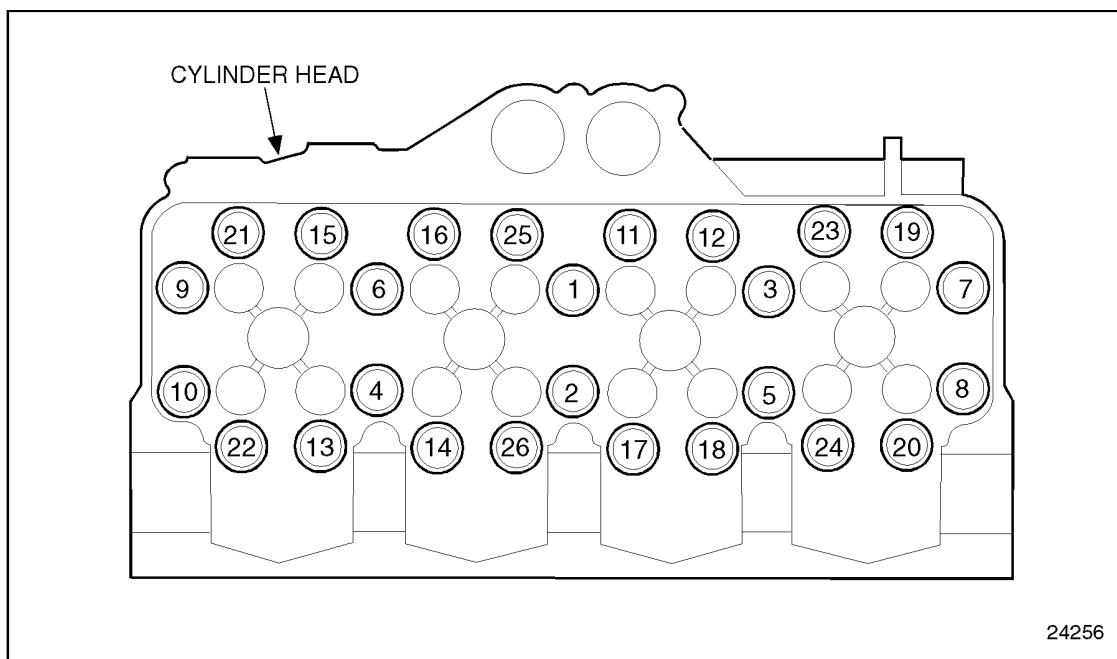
Cylinder Head Bolt Tightening Sequence
